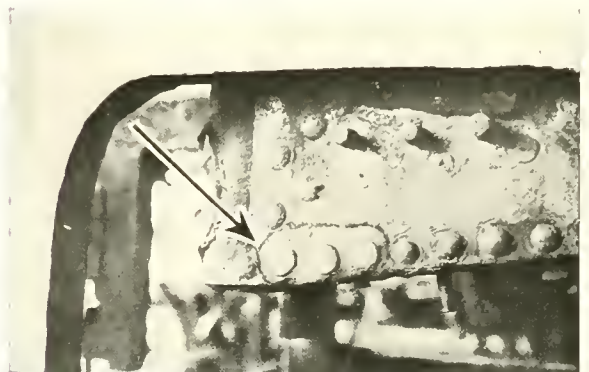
Leaky Rivets in mud ring repaired by building up metal around the head of the rivets as shown.
